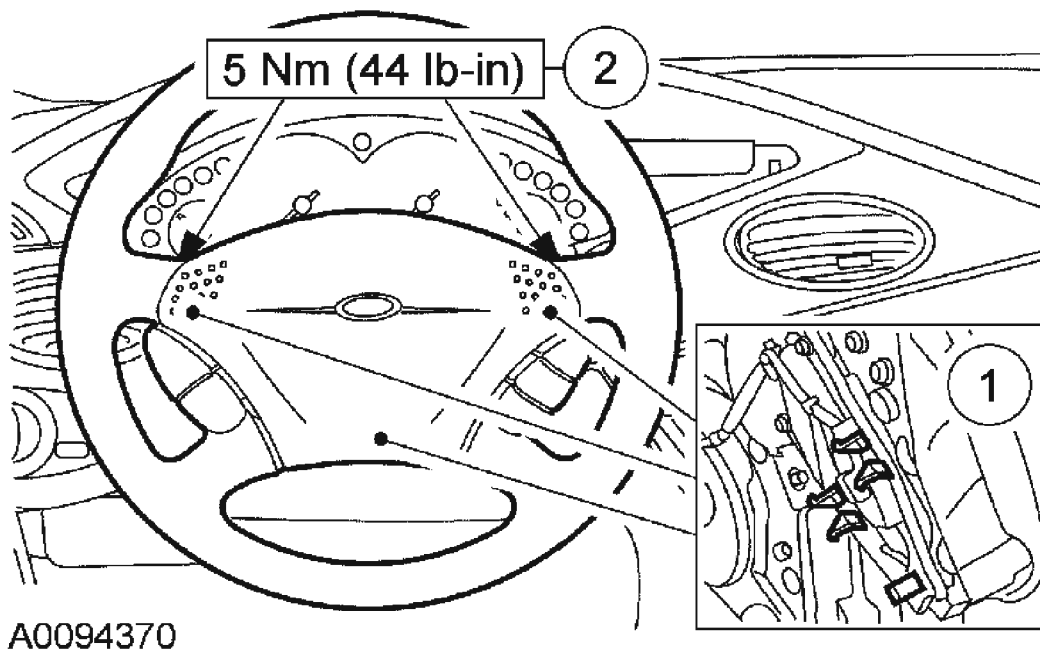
Installing Driver Air Bag Module To Steering Wheel
